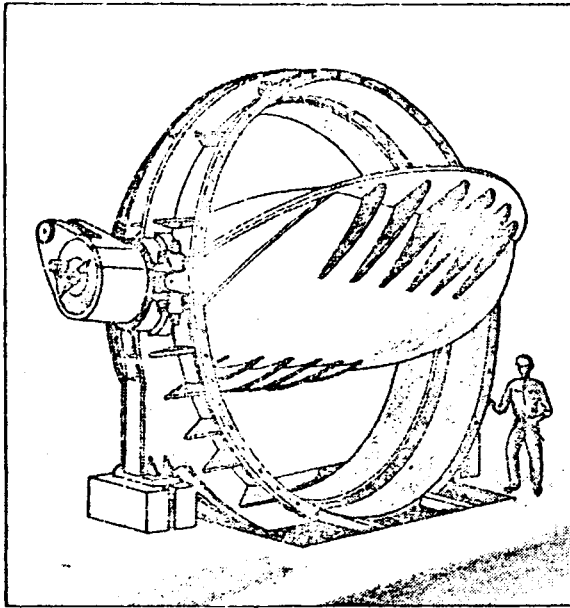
Butterfly valve in welded and cast design for the plant at Lavey, Rhone; tip diameter 5.1 m, maximum pressure head 45 m, $Q = 65 \text{ m}^3/\text{s}$ (Drawing courtesy Sulzer Fischer Wyss).
